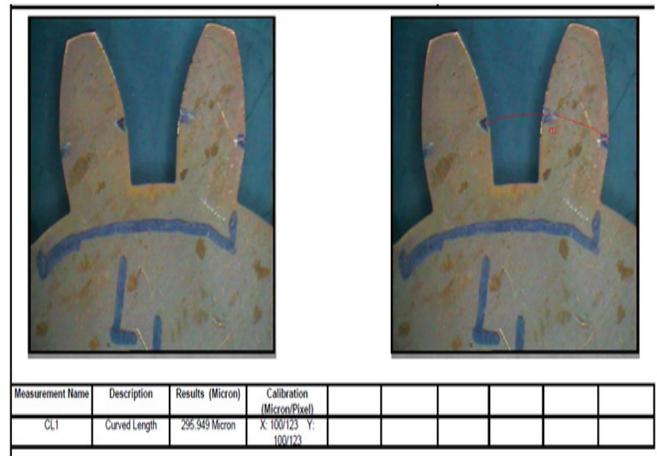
(b). Measurement of actual Pitch error right flank using Caliper pro software.
